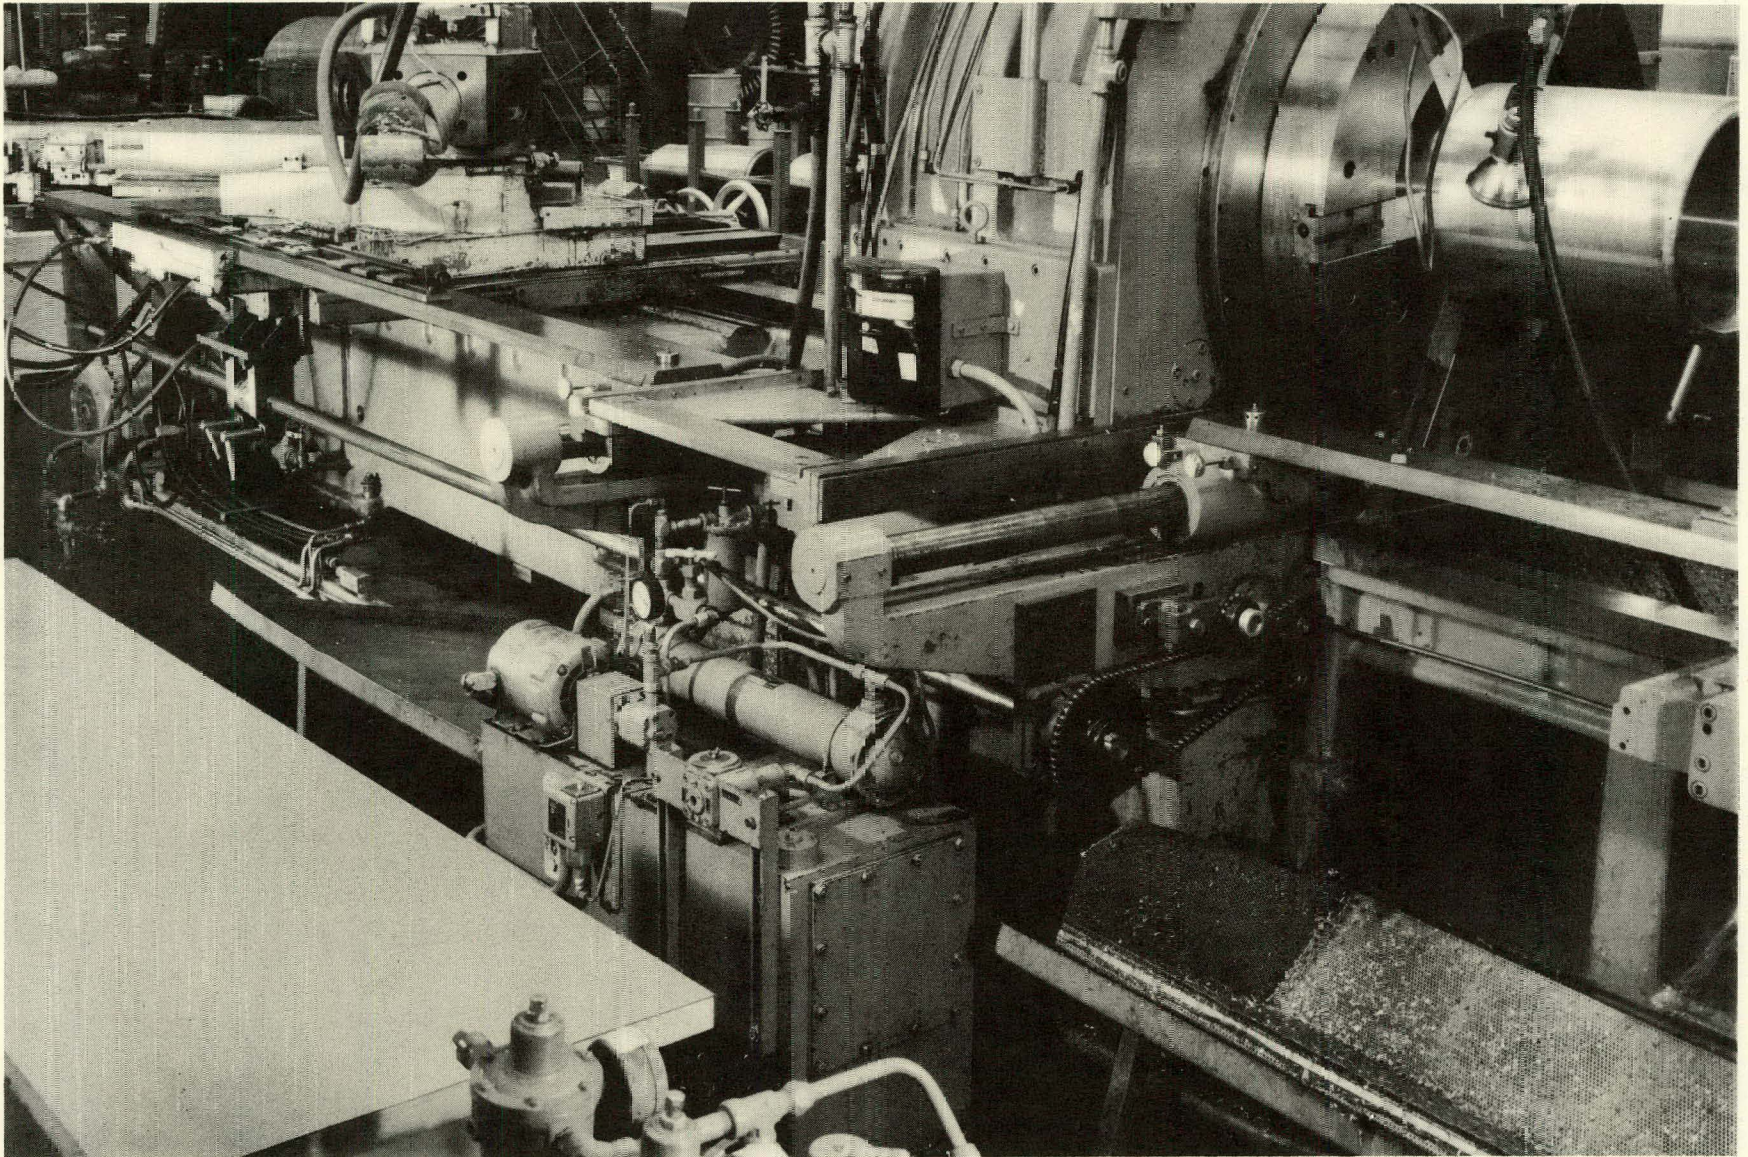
Synchronizing Attachment for Milling the Spiral Groove
